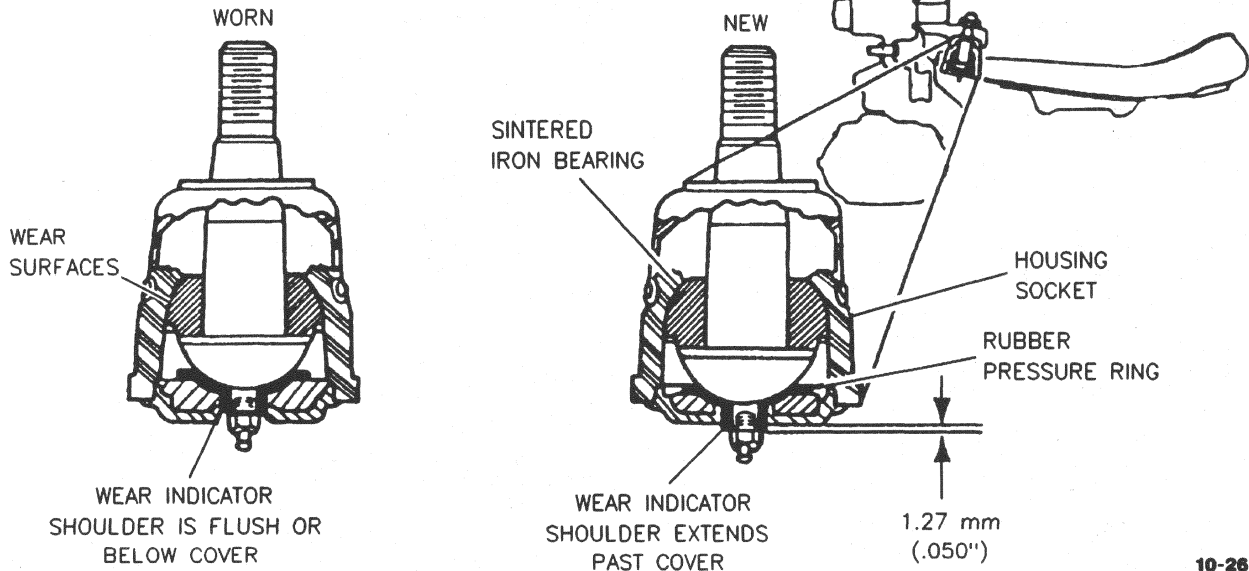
Front Lower Control Arm Ball Stud Wear Indicator
